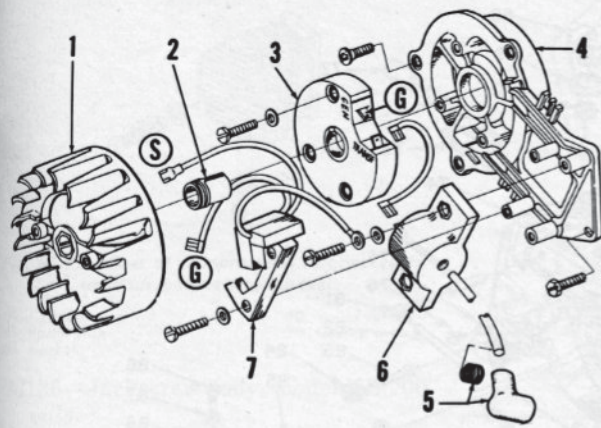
Exploded view of Phelon capacitor discharge type magneto first used on late model XL904 and models XL-924, XL-924W, SXL-925 and VI-955 and available for service replacement of magnetos used on models XL-850, XL-875 and early XL-904.
